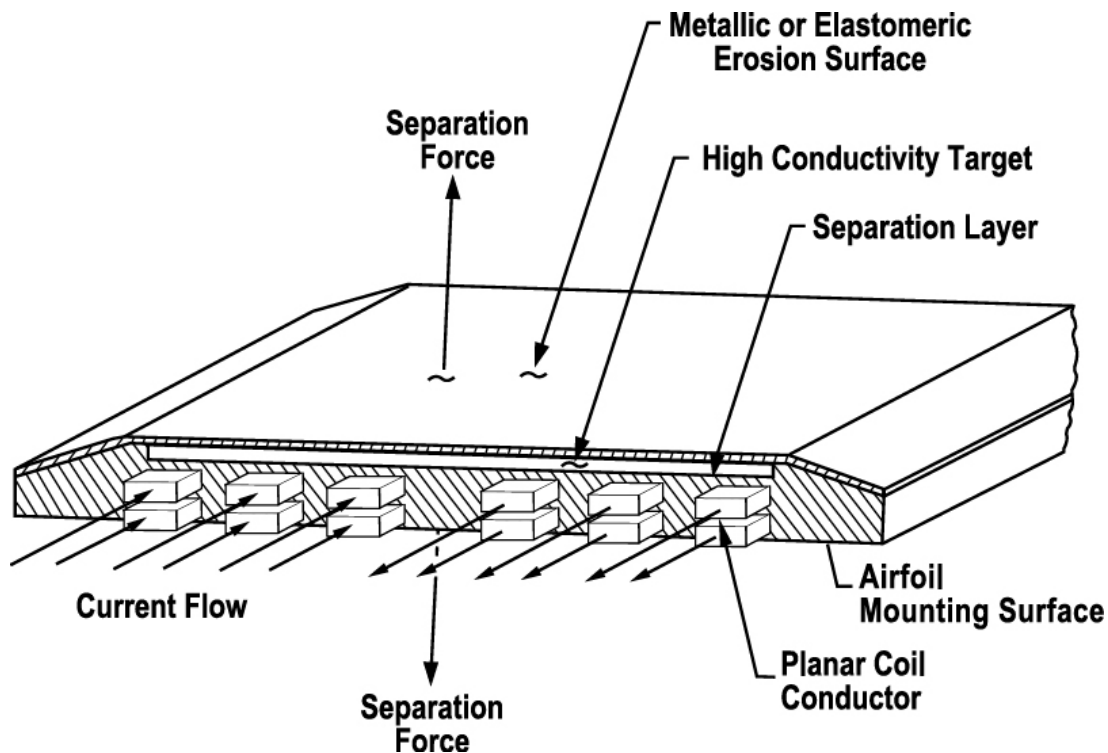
B-2. ECDS BLANKET ASSEMBLY
